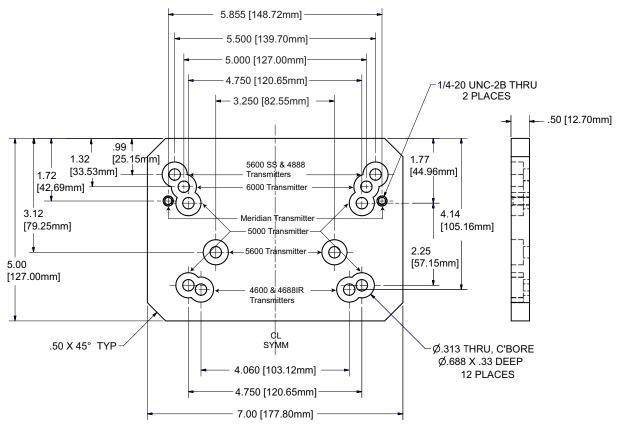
Retrofit Mounting Plate Dimensions - Al
